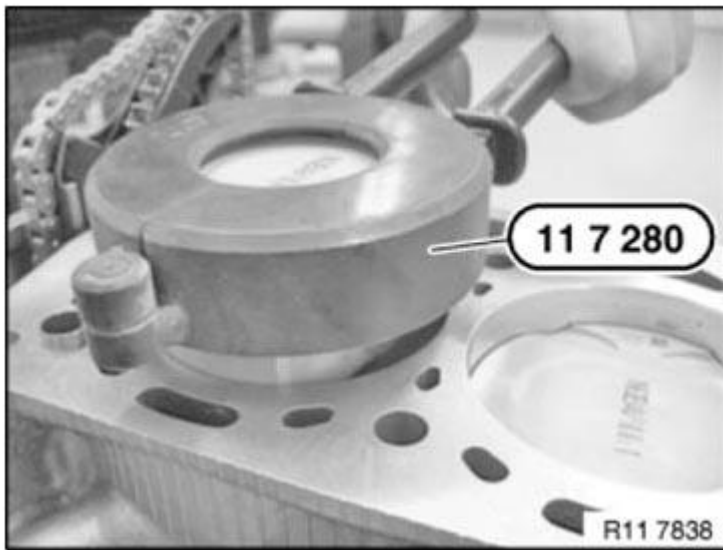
Compressing Piston Rods With Special Tool 11 7 280
